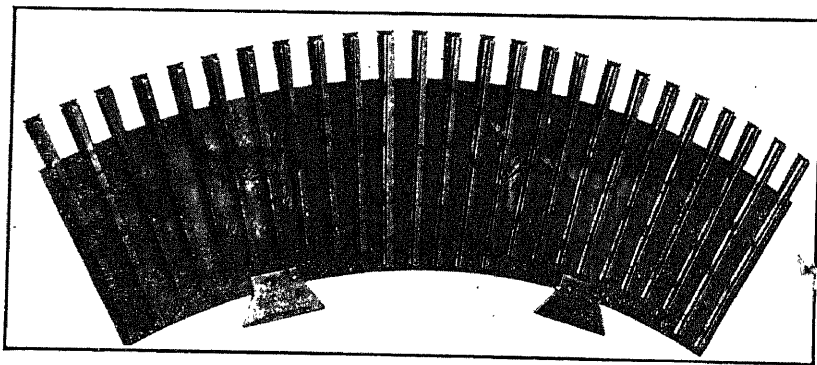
One segment for large-diameter armature with welded duct spacers.
